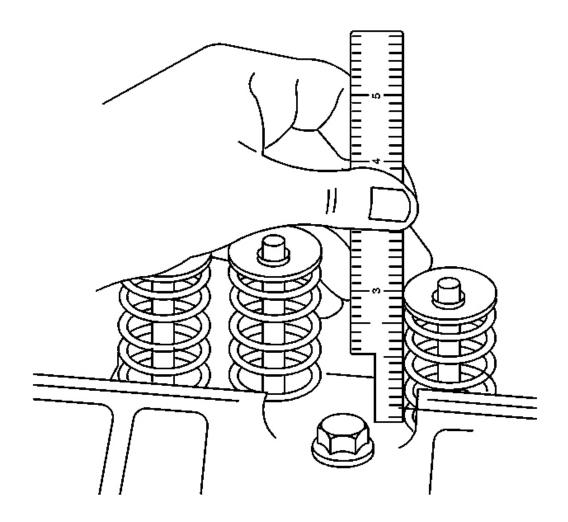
Measuring Valve Spring Installed Height Courtesy of GENERAL MOTORS CORP.
